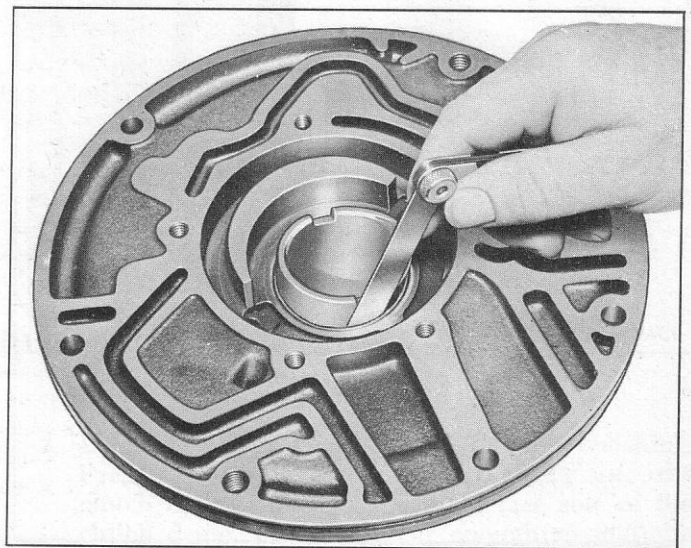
Checking Pump Body Bushing to Converter Pump Hub Clearance
